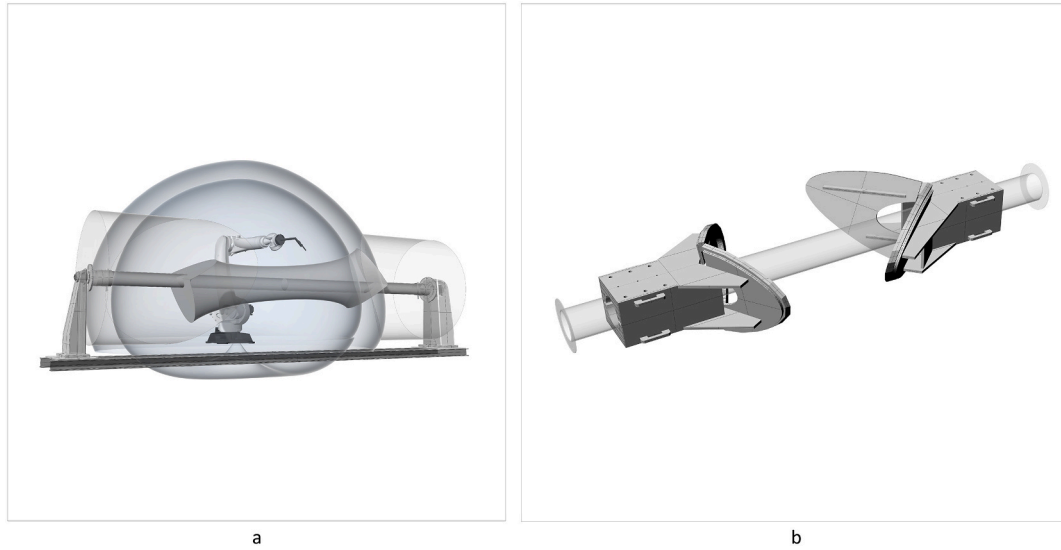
The RCFW fabricator: a. robot work envelopes: robotic manipulator and external rotational axis - perspective; b. timber winding tool, (c) ICD.
